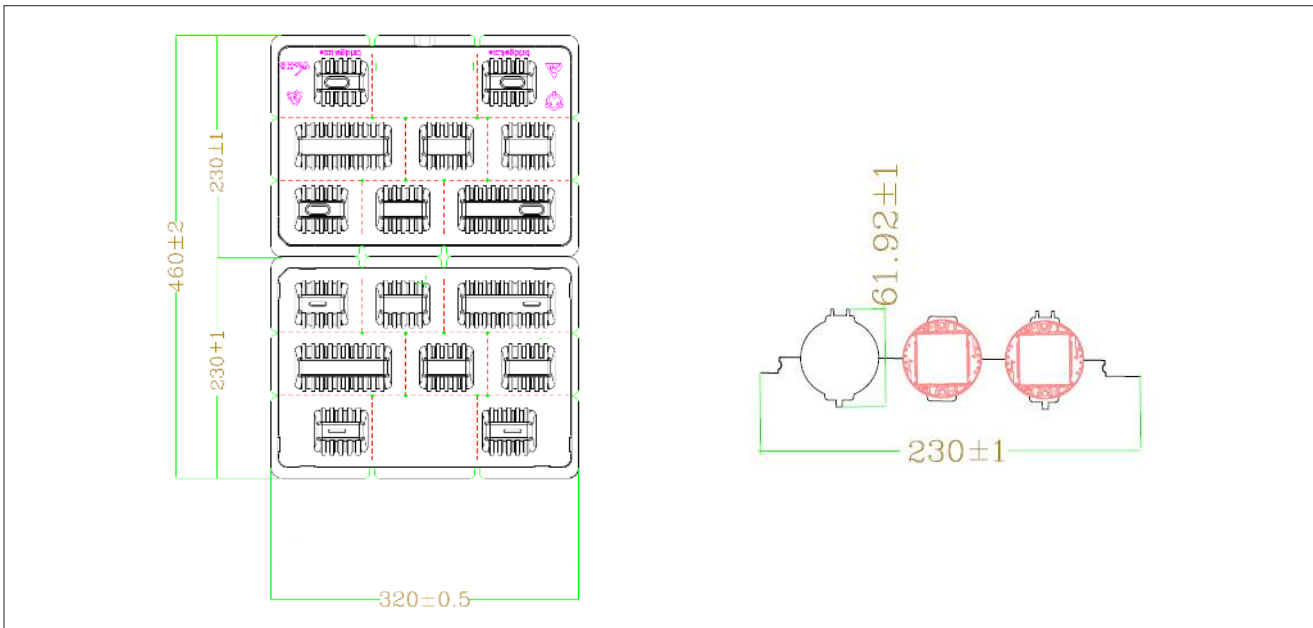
Drawing for Vero SE 18 Packaging Tray
